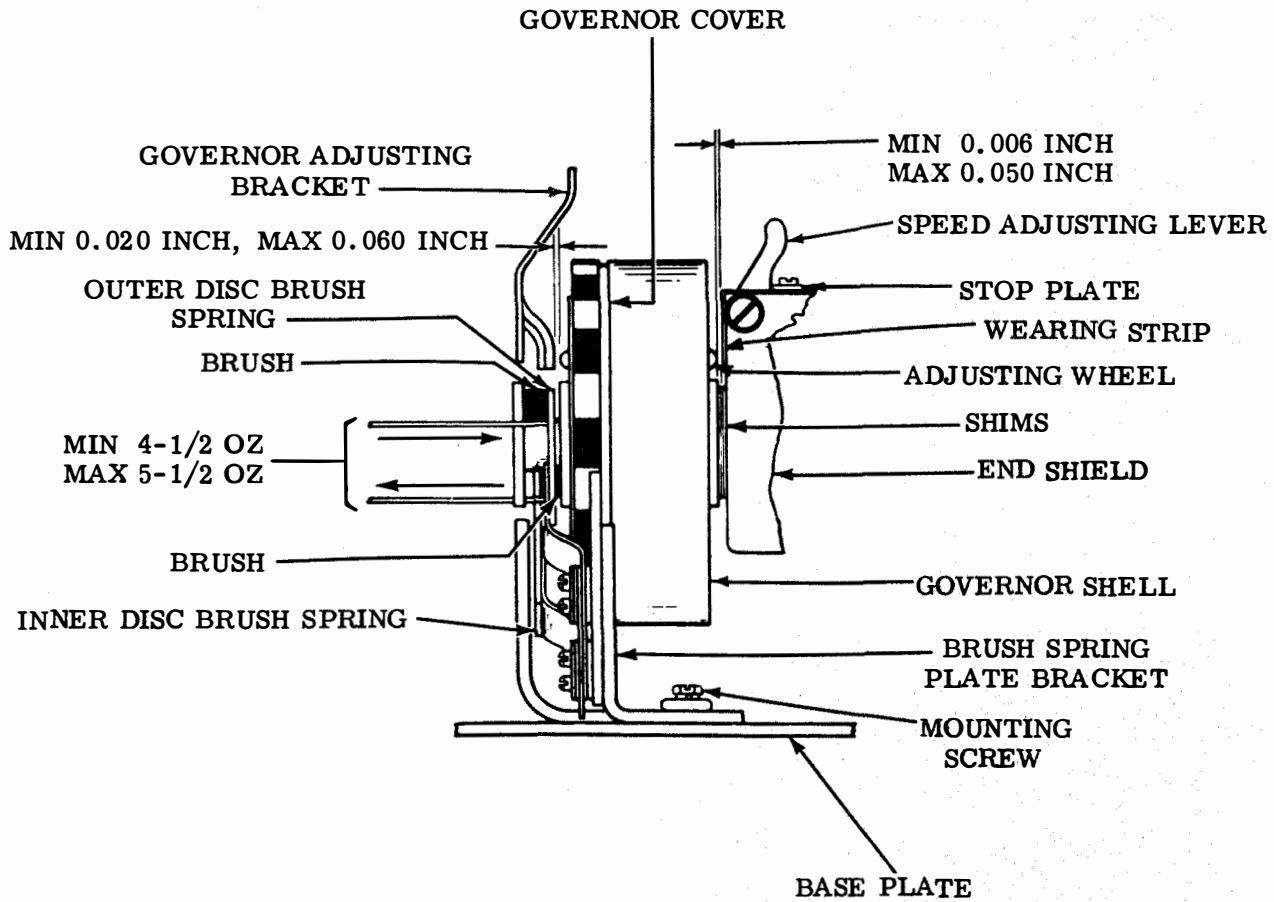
Governor Brush Spring Plate Bracket Assembly
